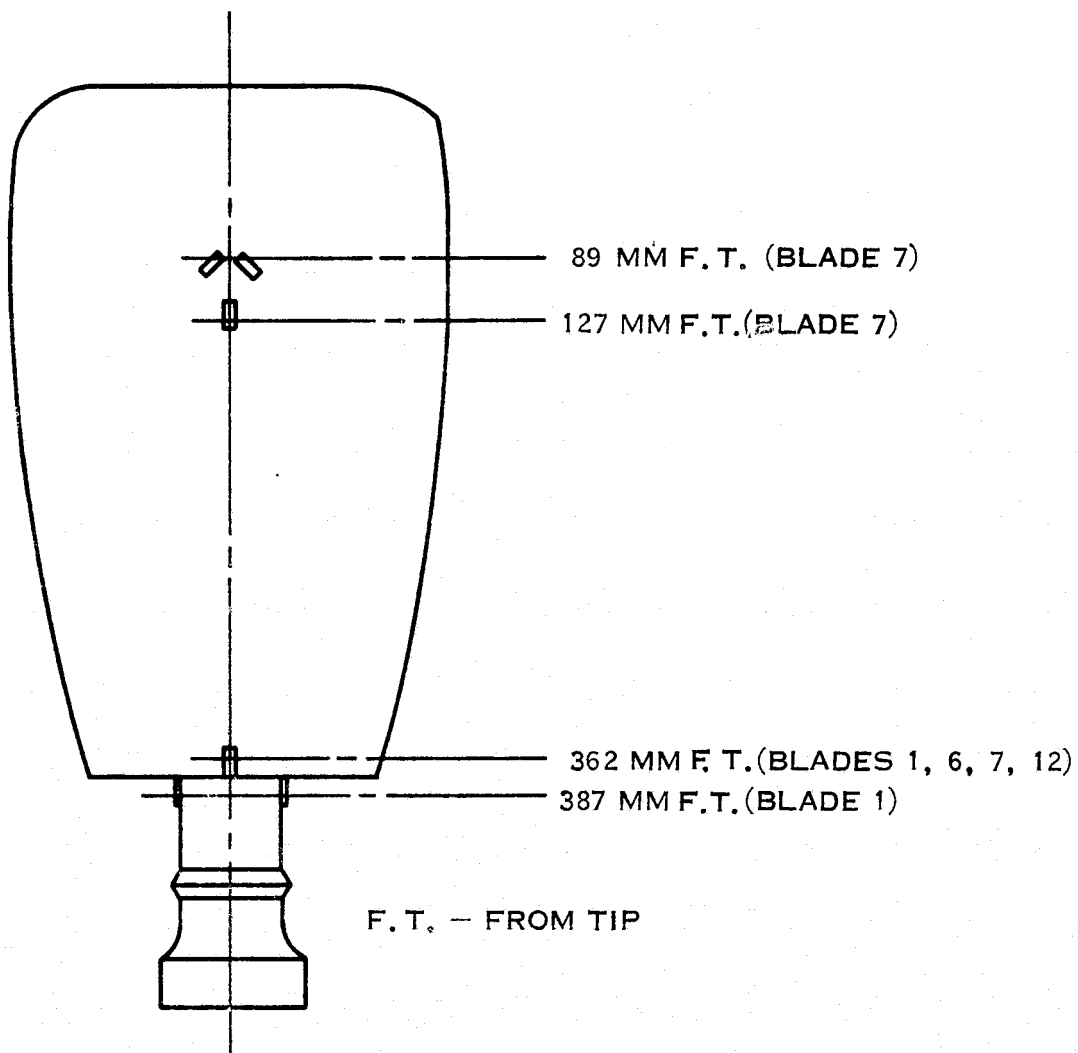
BLADE LAYOUT SHOWING VARIOUS GAUGE LOCATIONS
